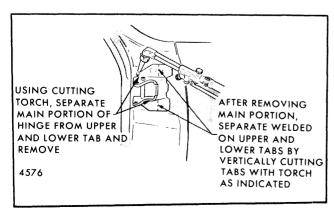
Body Side Hinge Strap Removal - "X" Styles
